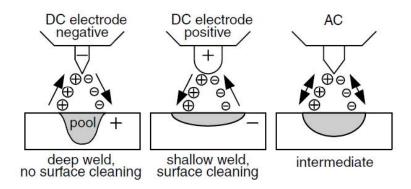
Different polarities and resulting weld bead shape [116]
